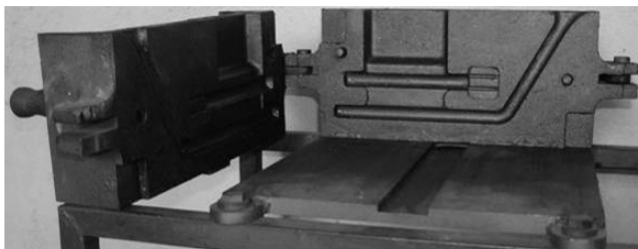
Metal mould for casting the test bars according to the ČSN 42 0334 standard
